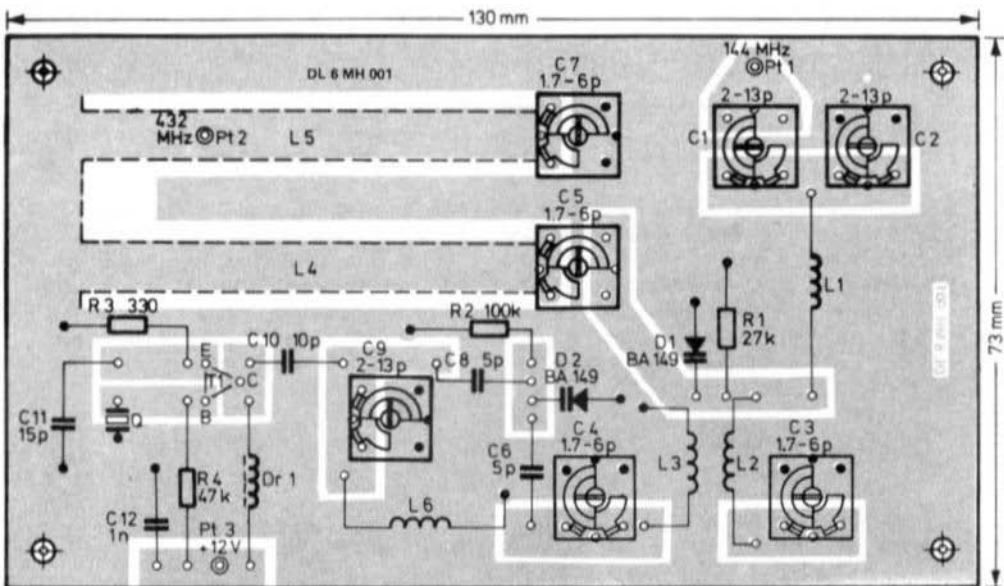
Printed circuit board DL 6 MH 001 showing the component locations
